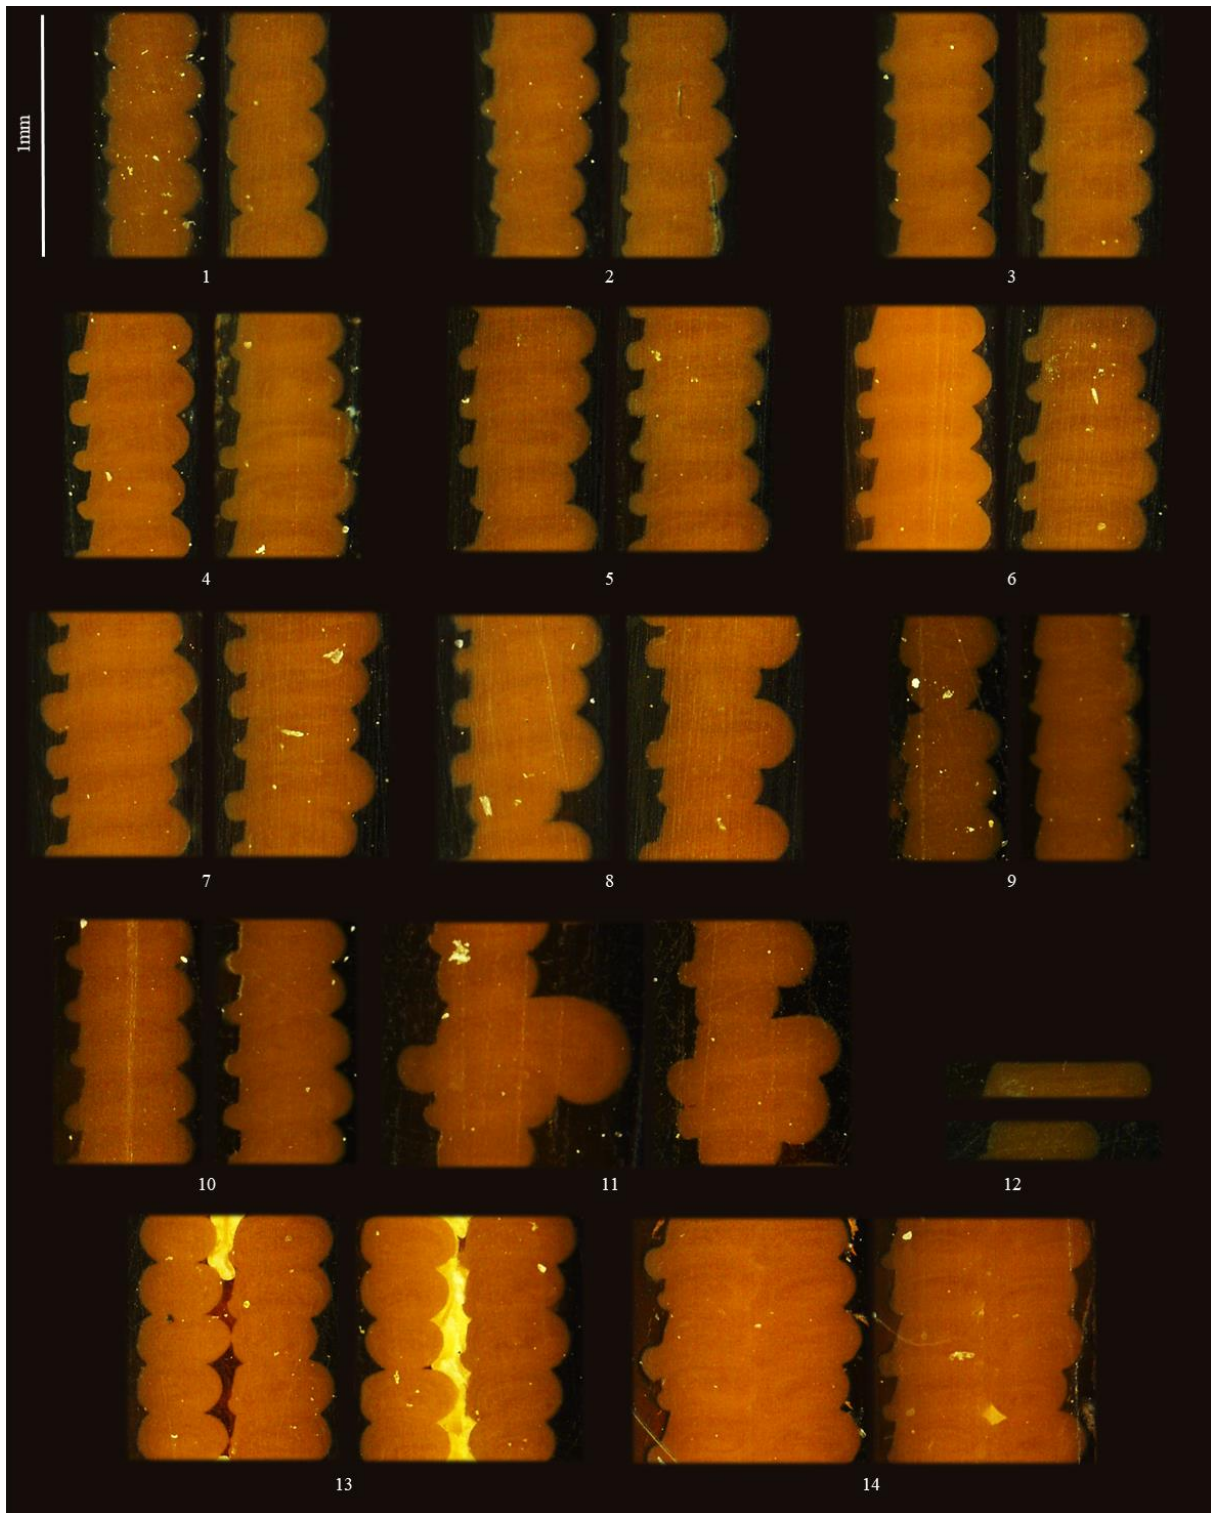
Cross-sectional images Modified Nozzle Design 3
